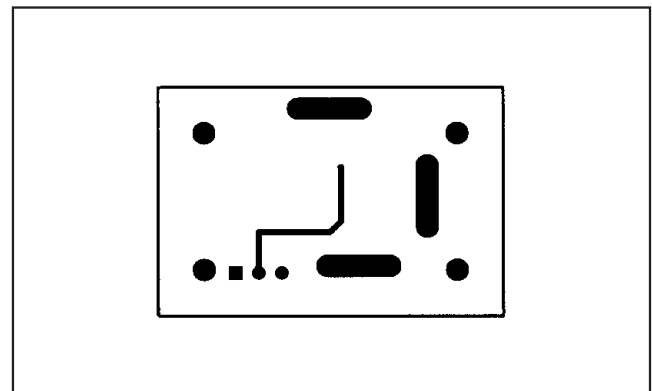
MAX662A EV Kit PC Board Layout—Solder Side (1x scale)
